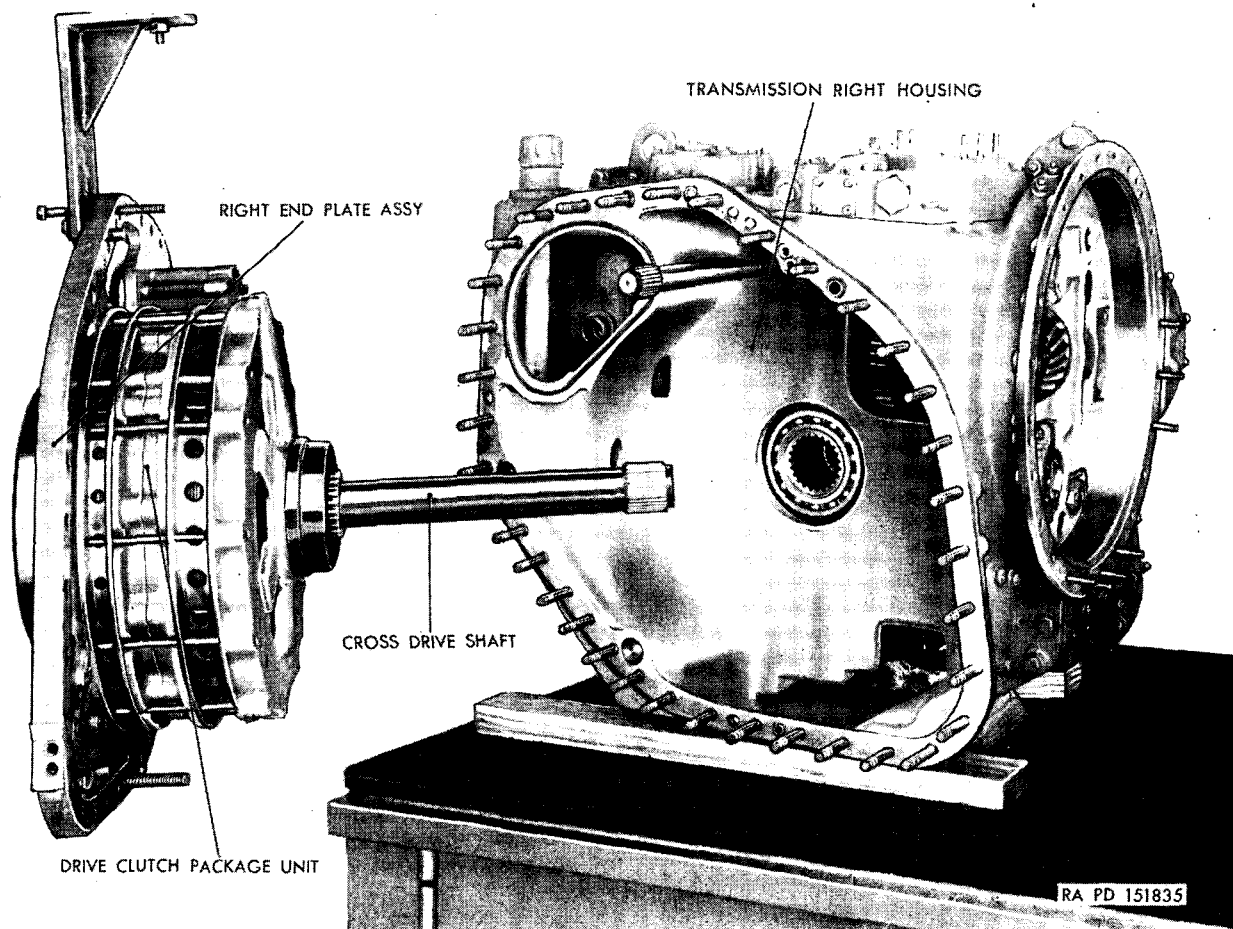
Removing or installing right-end-plate assembly using lifting sling (41-S-8830-550).
